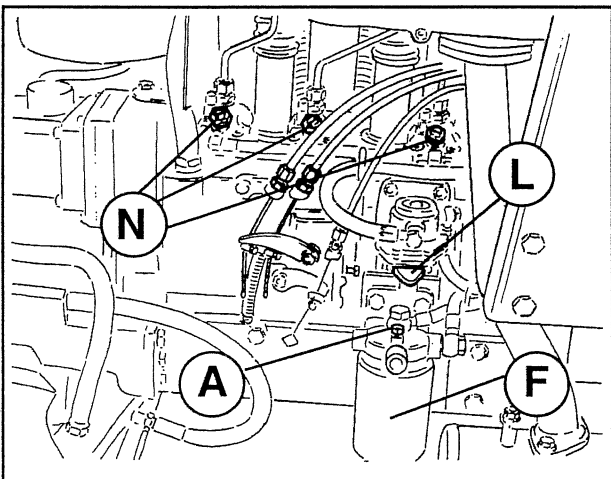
Venting air from the 11LD 626/3 engine fuel circuit (model 4040).
